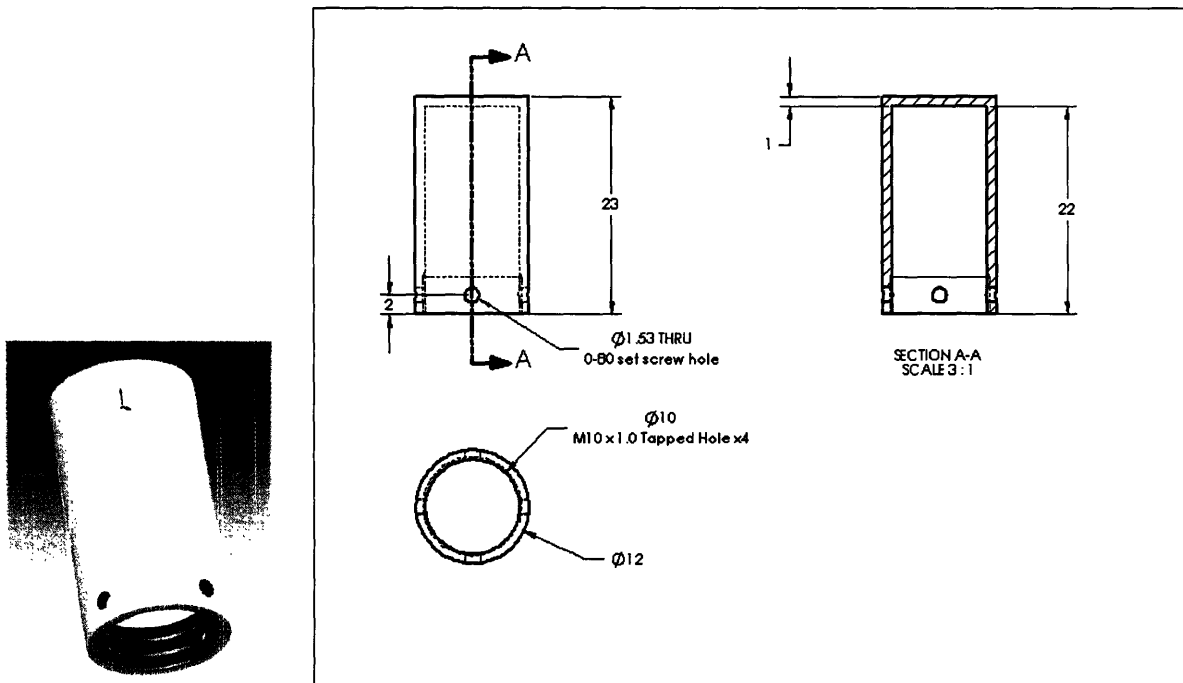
Rendering of titanium cap and schematic describing in millimeters the dimensions of the component. Four screw holes match up to the slots on the implant cylinder to prevent the cap from unscrewing.
